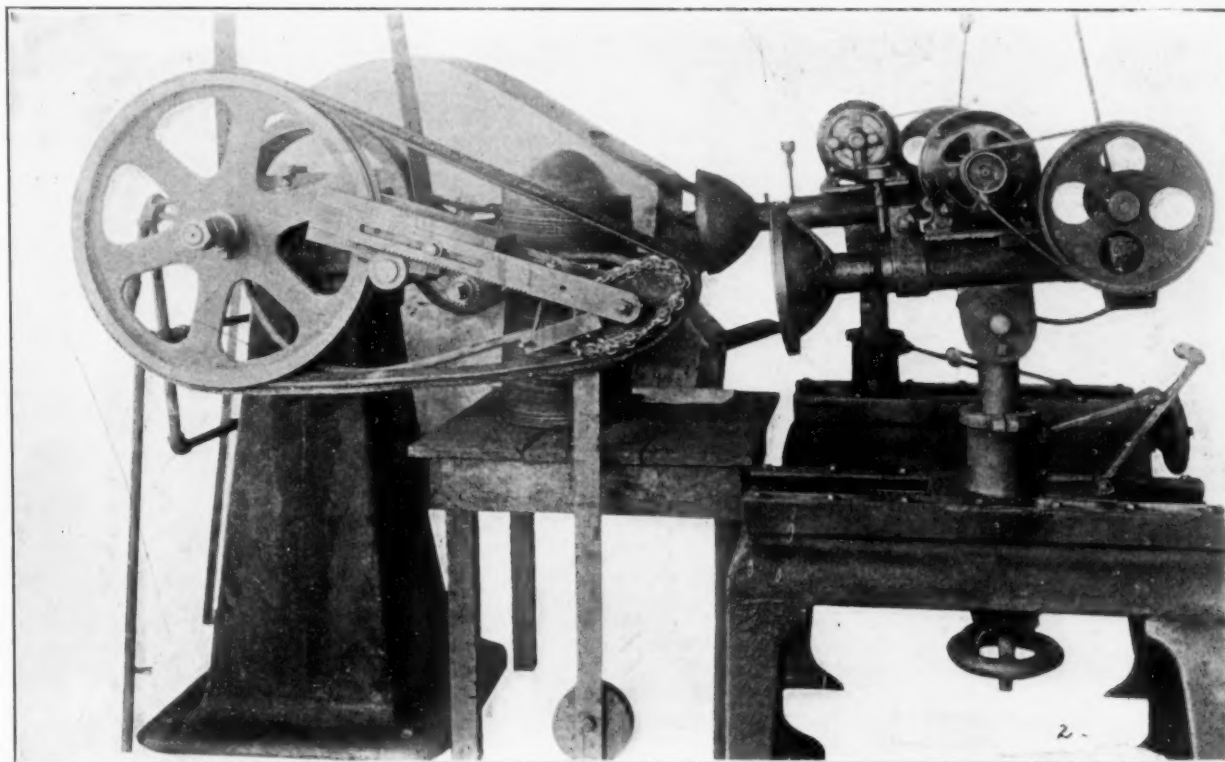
SHOWS STRAIGHT IN-DRIVE MACHINE DESIGNED AND BUILT FOR POLISHING AND BUFFING PARABOLIC REFLECTORS. THIS MACHINE CONSISTS OF A STANDARD WITH BED UPON WHICH A SLIDING HEAD STOCK WITH INDIVIDUAL MOTOR DRIVEN SPINDLE CAN BE MOVED, FORWARD OR AFT, WITH A VERTICAL ADJUSTMENT, ALSO A STANDARD SUPPORTING DRIVE PULLEY, AND ADJUSTABLE FOOT, BETWEEN WHICH THE POLISHING BELT IS STRETCHED. THE ADJUSTABLE FOOT CONSISTS OF A STEEL FORM WITH A HARDENED TUBULAR ROLLER CHAIN, WHICH CONFORMS TO THE PARABOLIC SURFACE TO BE POLISHED.
